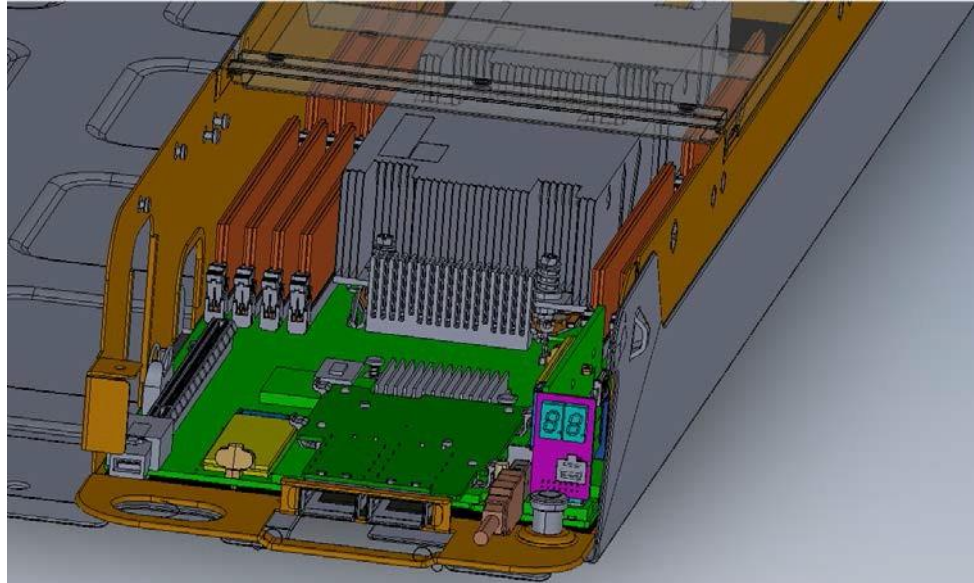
3D View of Mezzanine Card installed in OCP Chassis – Example
